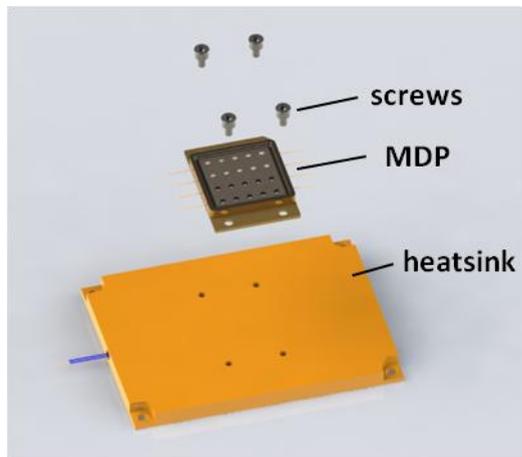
Schematic drawing of MDP mounting- process on heatsink under usage of 4 screws.
